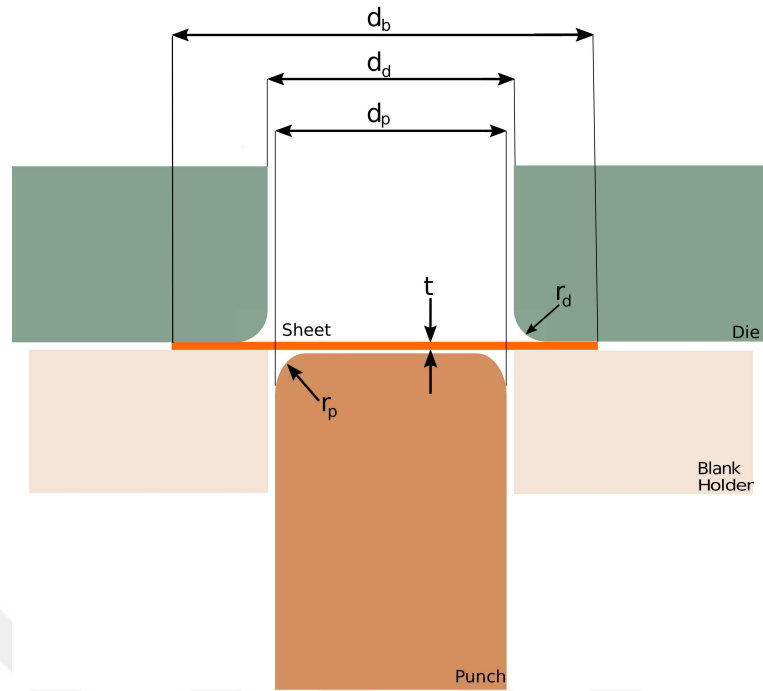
Schematic views of the tools and blank used in the cylindrical cup drawing
